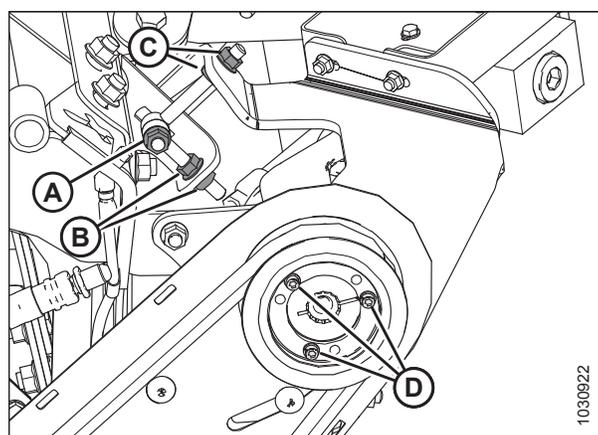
Drive Pulley – Conditioner Drive Motor
